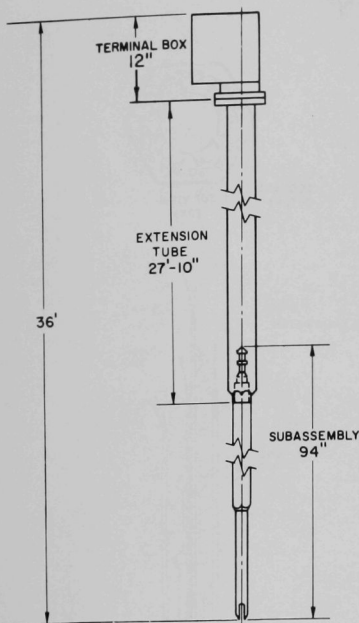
Instrumented Subassembly and Extension Tube. ANL Neg.
